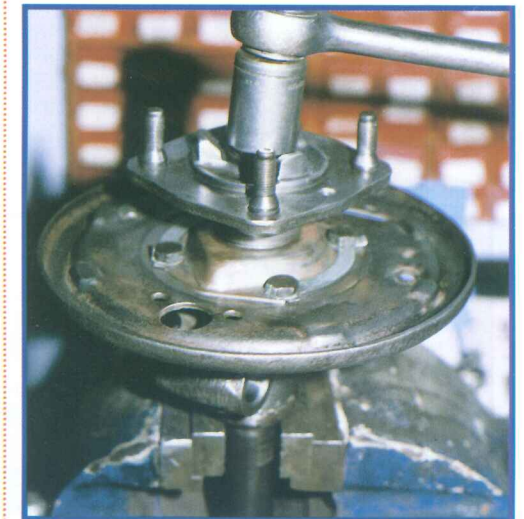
Ensuring that the taper is clean and that there are not burrs on the hubs and the keyway, fit the key and hub to the end of the half shaft. Secure the hub with the larger washer and nut and tighten to 90 - 120 lb/ft. It may be that, as with the removal, you can only finally torque it up when back on the car.
